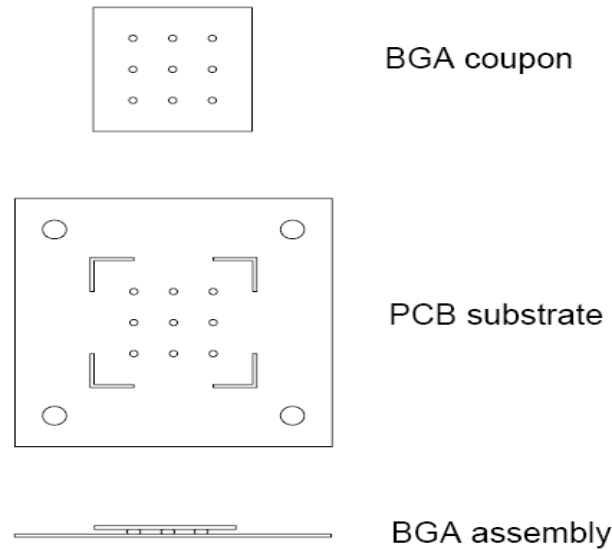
Schematic of test coupons and simulated BGA assembly.
